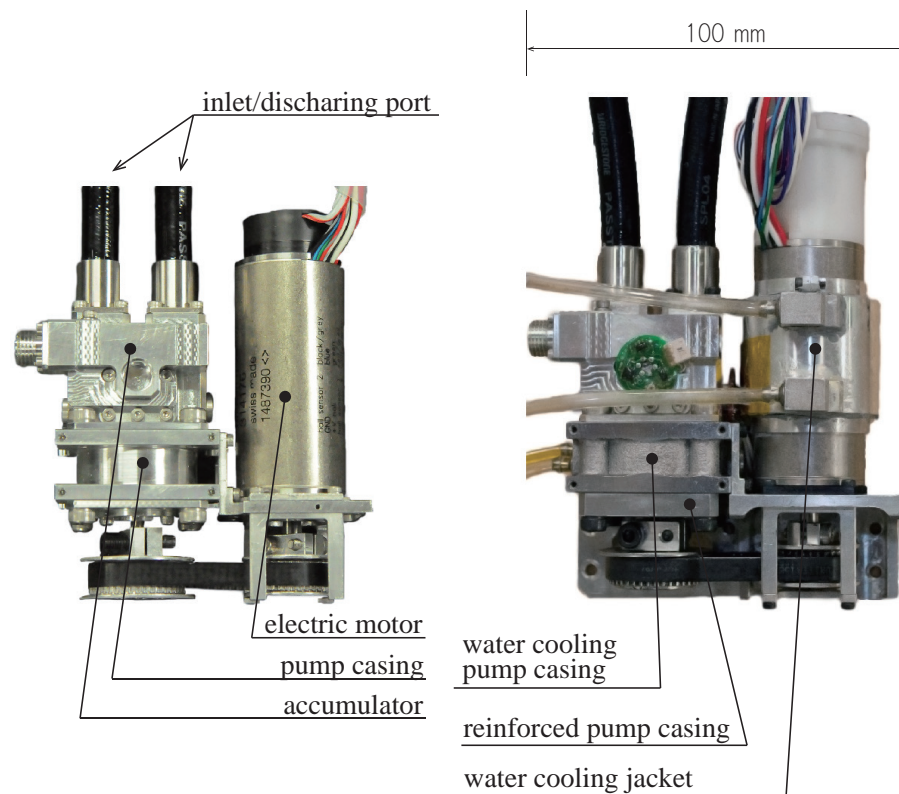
Comparison of the original design (left) and our modified design (right) of the pump. The pump casing is integrated with the 3D printed water cooling jacket. The pulley side casing is also reinforced to have higher stiffness. The electric motor is also modified to be cooled by a water jacket.
